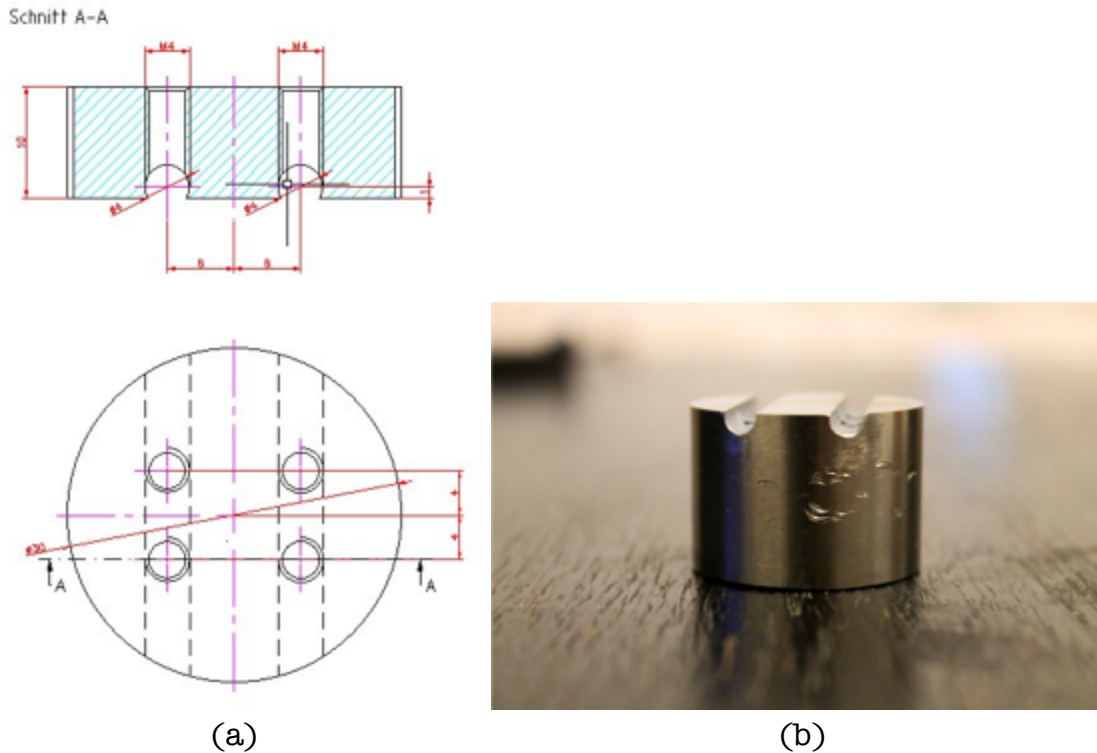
(a) Engineering drawing and (b) photograph of the specimen holder for specimen preparation.
